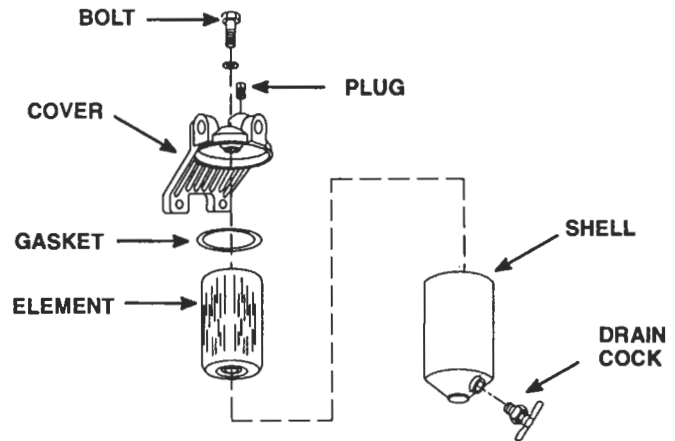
Fuel Filter and Fuel Strainer Part Locations
